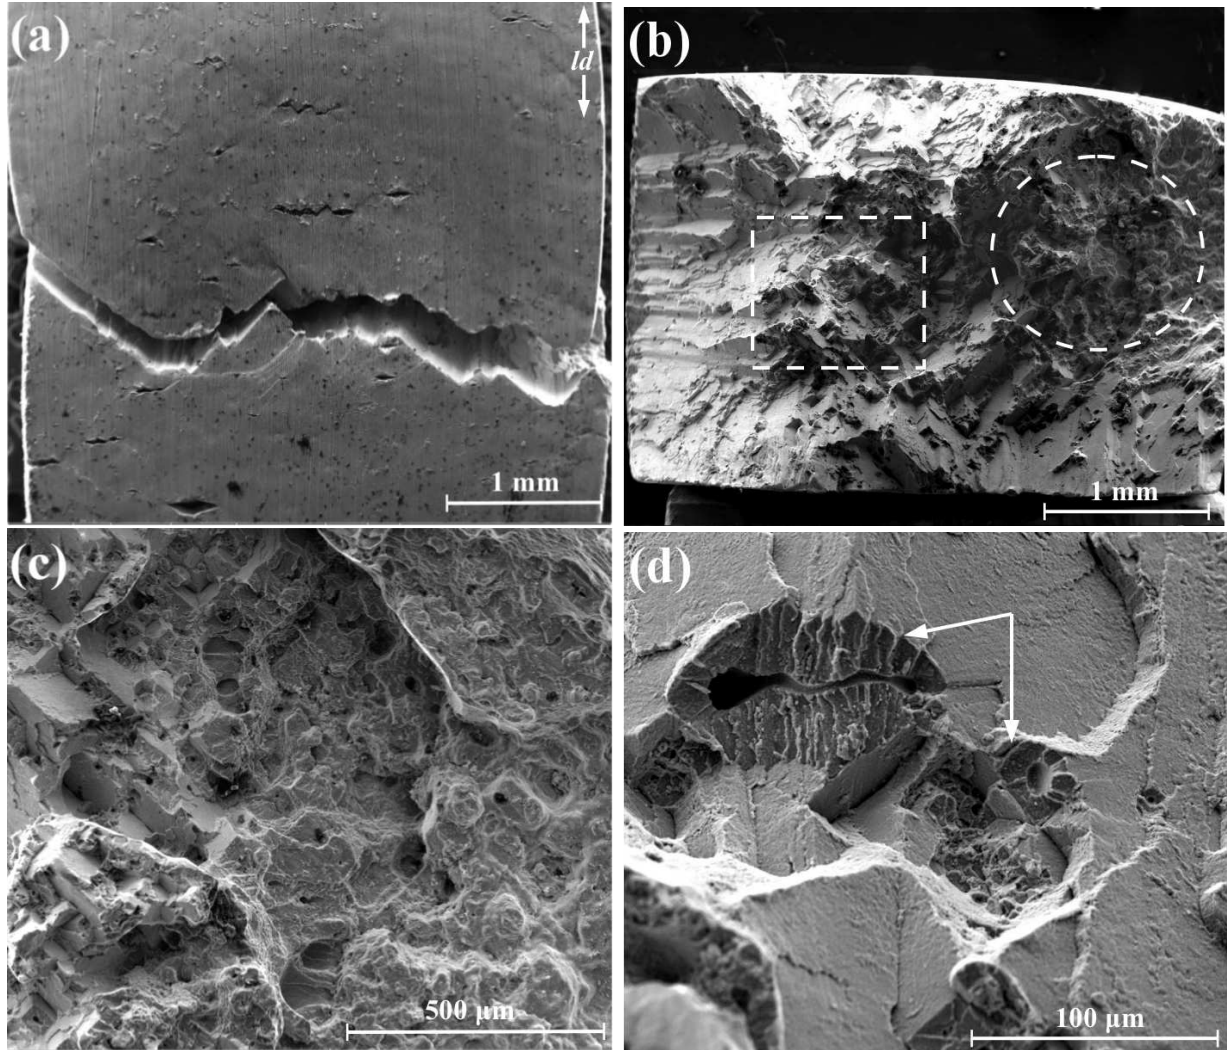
SEM images of a 3.18mm thick sheet specimen tested at 760°C/758MPa. (a) The region near the fracture surface reconstructed after rupture (the loading direction is  $ld$  and the sheet thickness is into the plane). (b) The fracture morphology of the upper half of the specimen in (a) (the loading direction is into the viewed plane). (c) Zoomed view of the region enclosed by the dotted circle in (b). (d) Zoomed view of the region enclosed by the dotted rectangle in (b).
